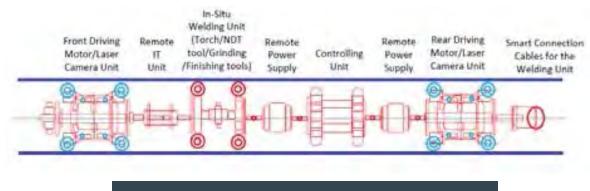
Colorado School of Mines Module; In-Situ Repair Welding Robot.
